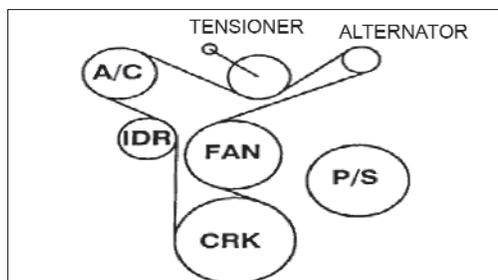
BELT ROUTING TO ISOLATE POWER STEERING PUMP FROM THE ACCESSORY DRIVE
